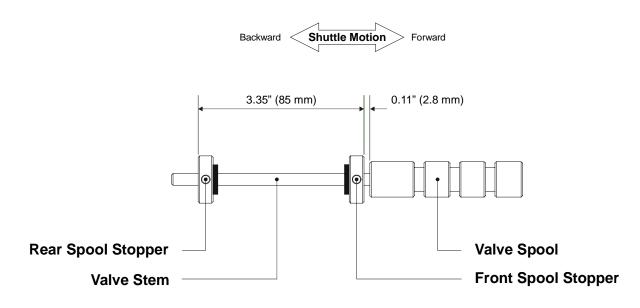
Spool valve assembly illustrating the initial settings for the front and rear spool stoppers. Arrow indicates shuttle feed plate movement.
